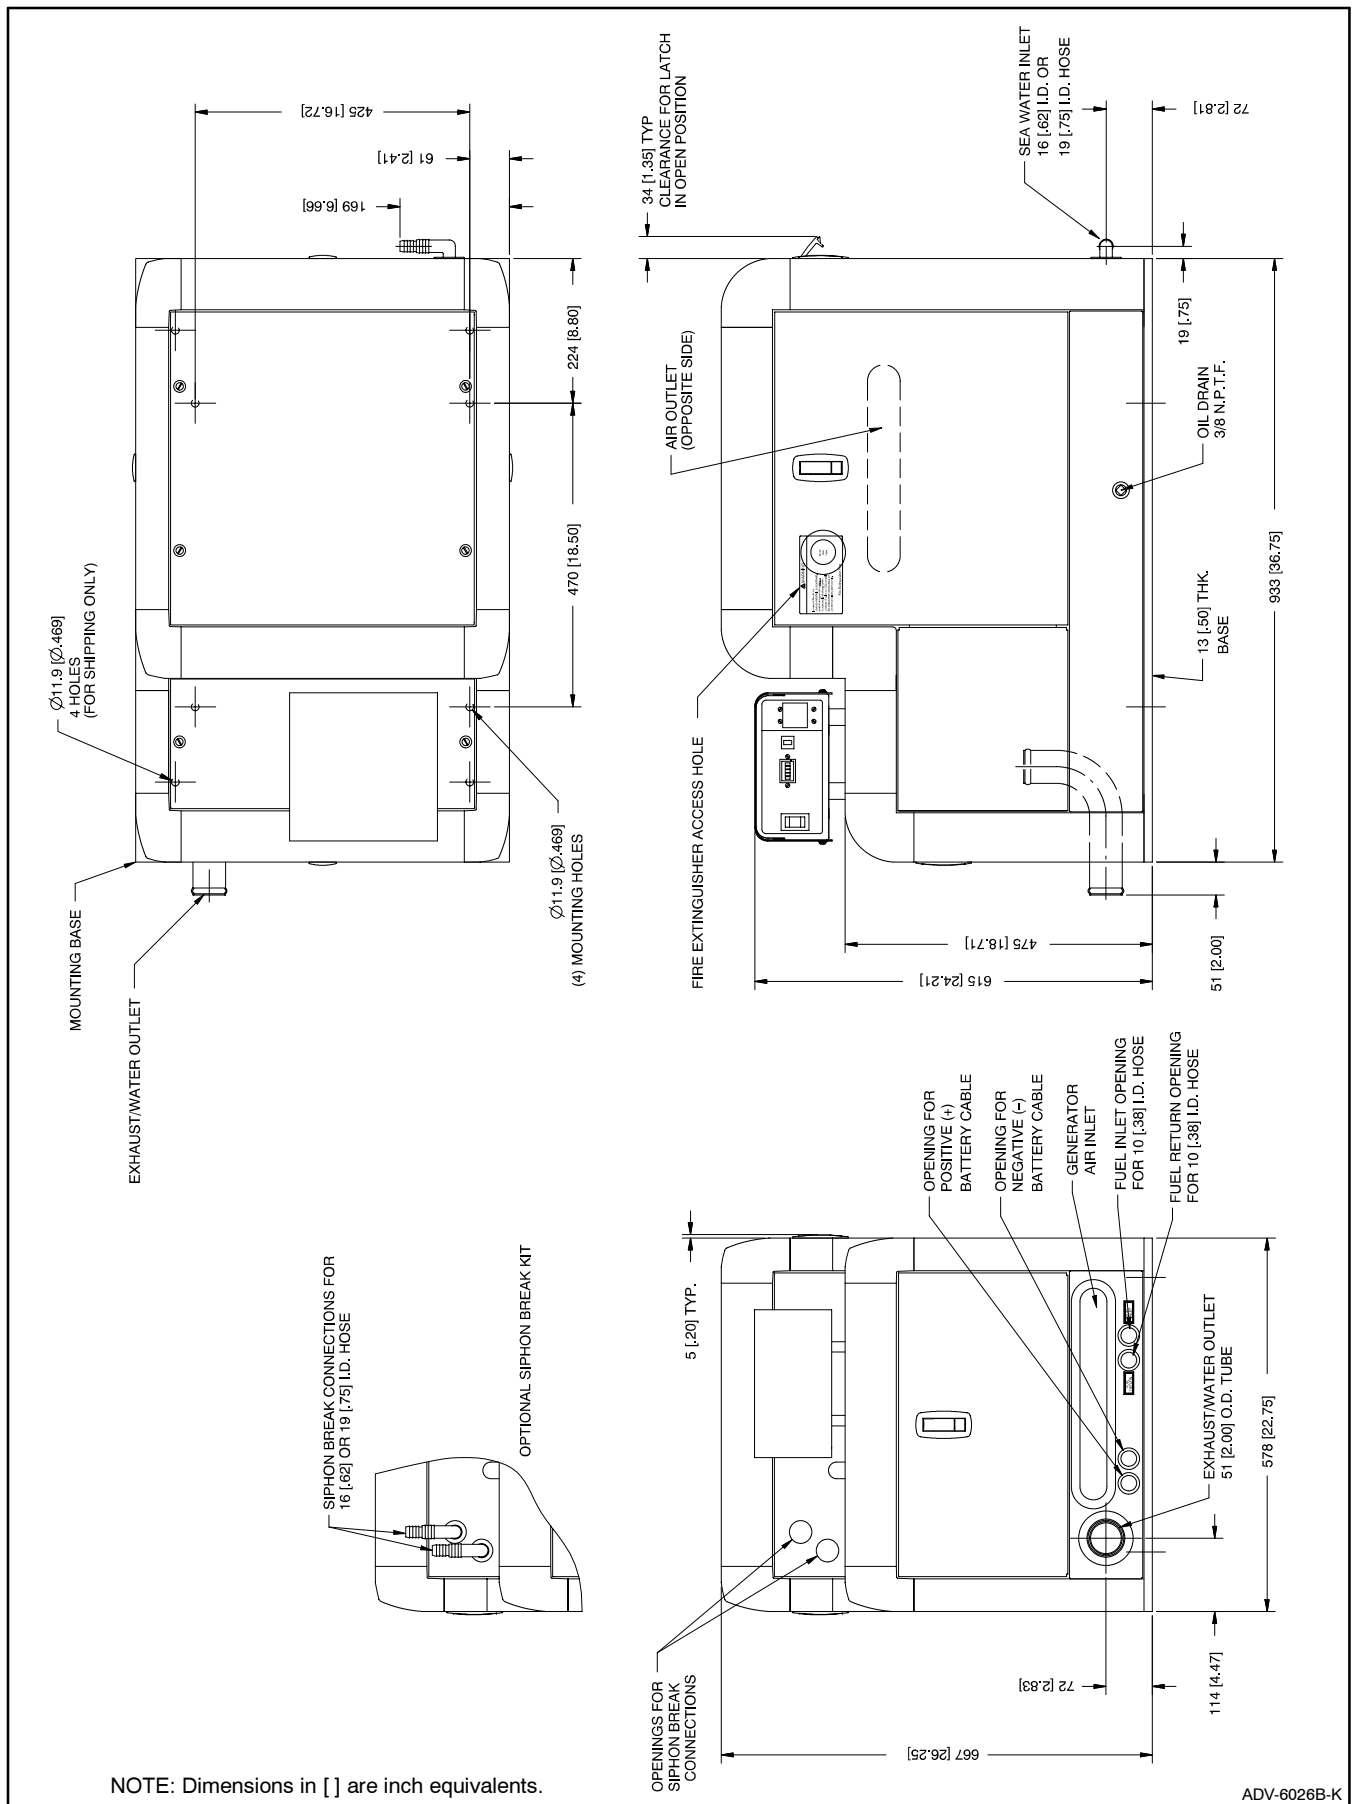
Dimension Drawing, 8.5/9EFOZ and 10EOZ with Sound Shield
